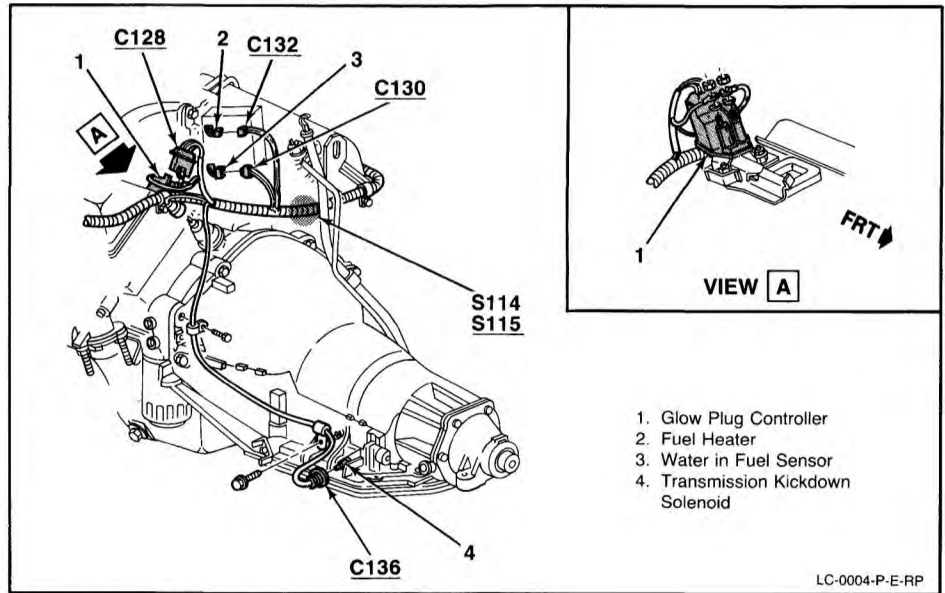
Engine Wiring Harness — Rear (RPO LL4)
